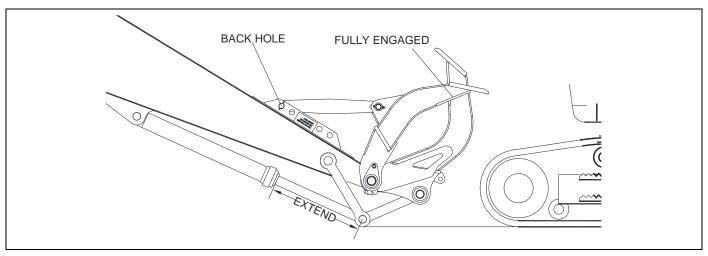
Direct Pin-on Mount. Position Stick As shown. Pin the Stiff Arm to Mounting Pad
